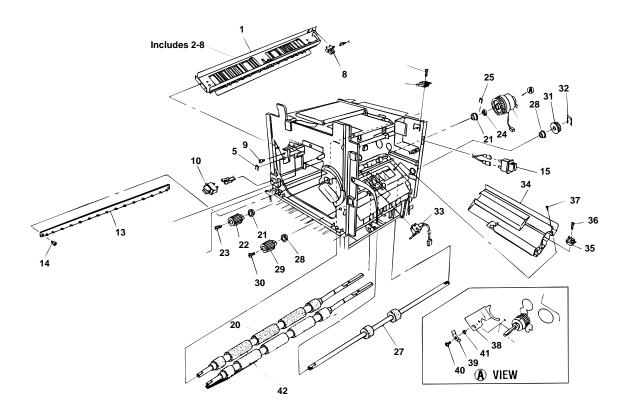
Main Frame Assembly Parts Locational Diagram
